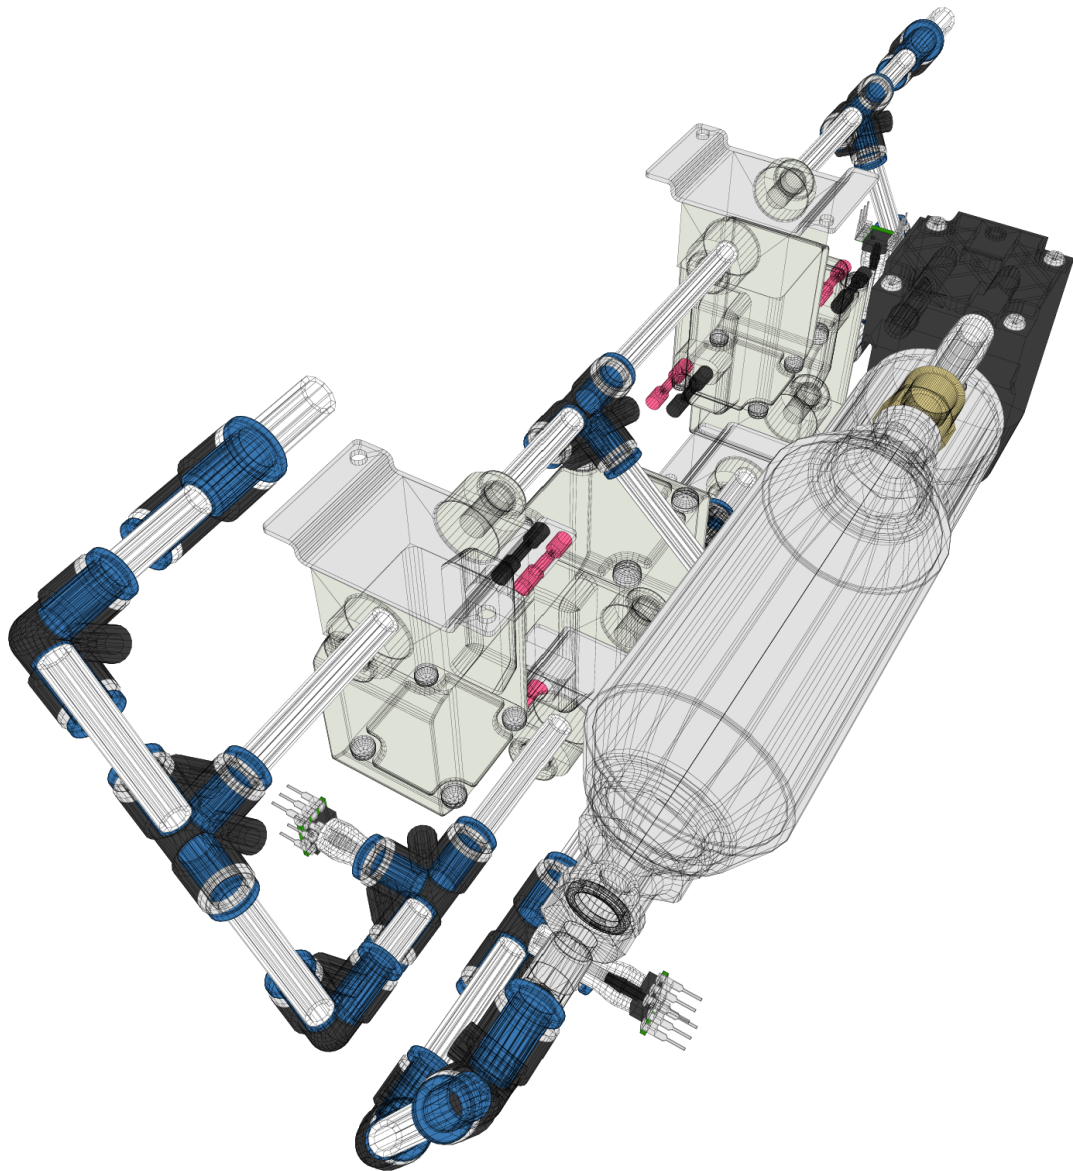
CAD alignment view of the pneumatic assembly in its assembled configuration, showing the relative placement and alignment of almost all the components, despite the air chambers. The figure is intended to clarify physical integration and routing; functional flow and control logic are described by the schematic in Figure 4.8.
